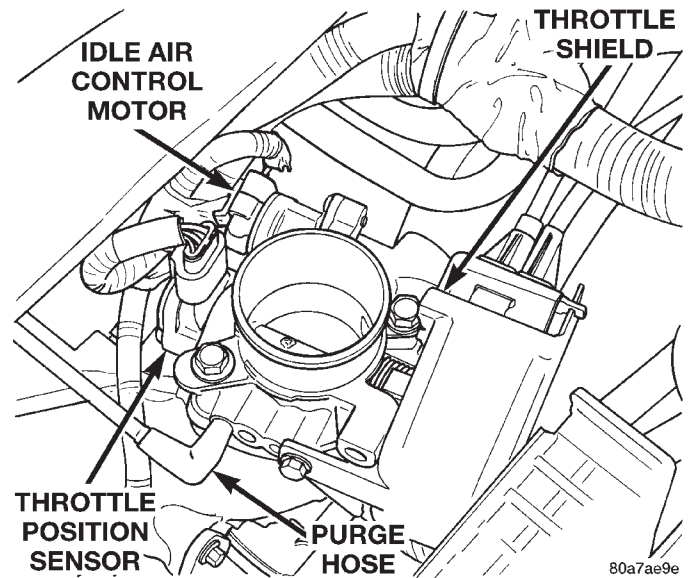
Idle Air Control Motor and Throttle Position Sensor—2.4L Engine
